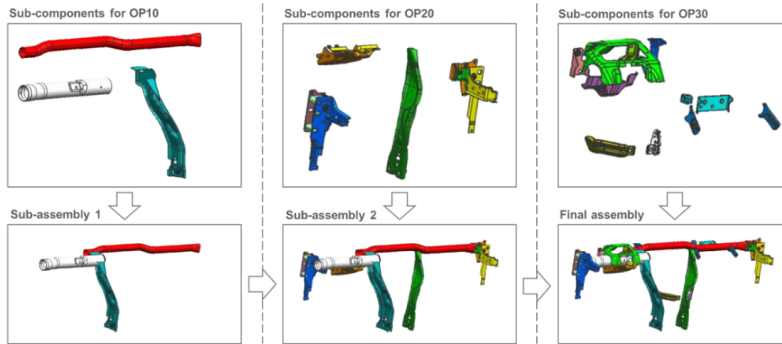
Example of a three-operation welding process of a cross car beam.
